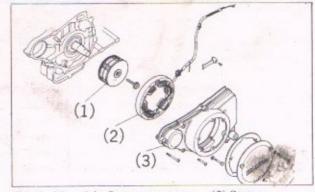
(1) Generator rotor (2) Stator (3) Left crankcase cover
